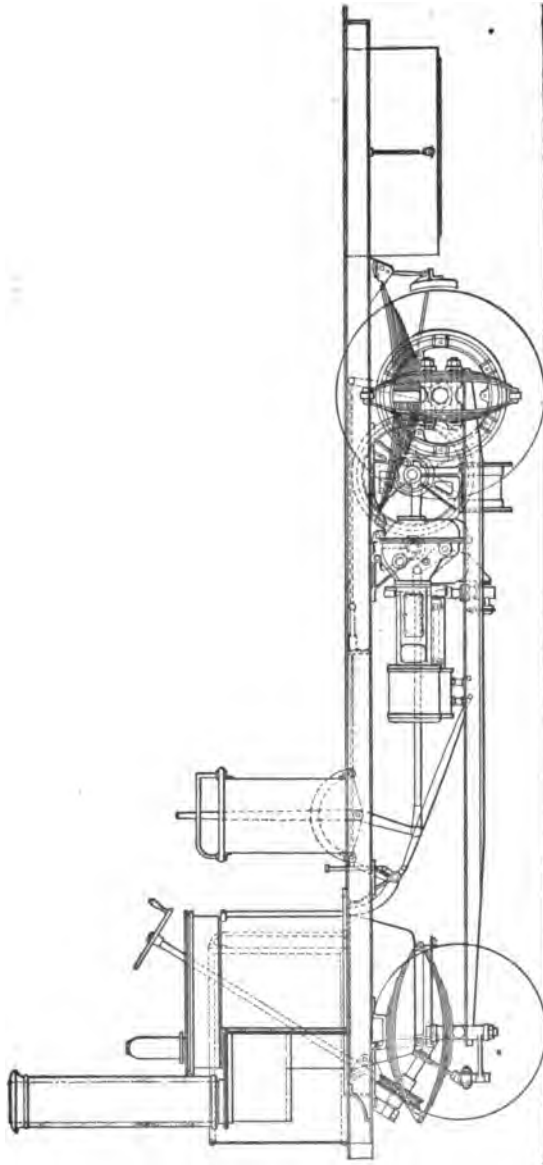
Side Elevation of the Thornycroft Steel Wagon, showing engine and parts in position.
